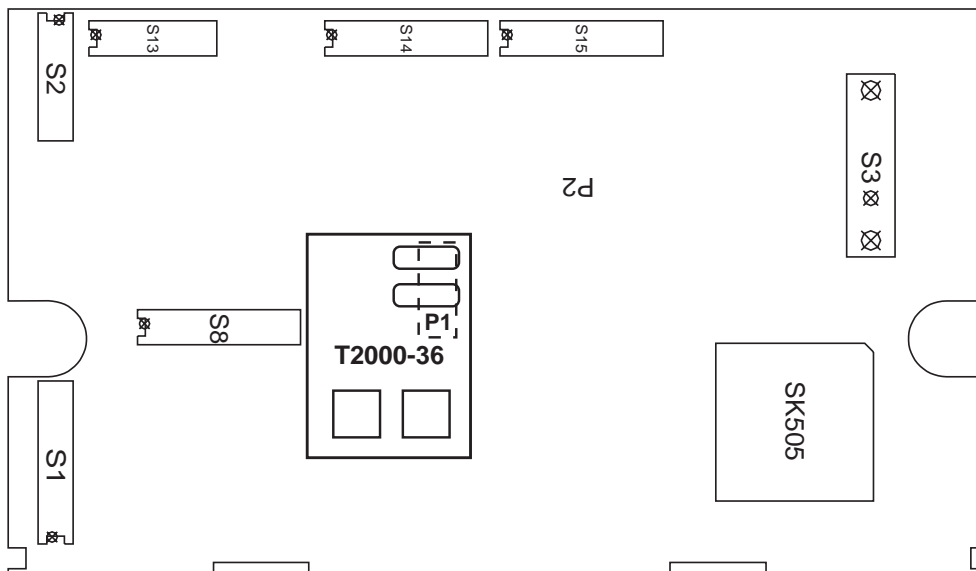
T2000-36 Selcall PCB Mounting
